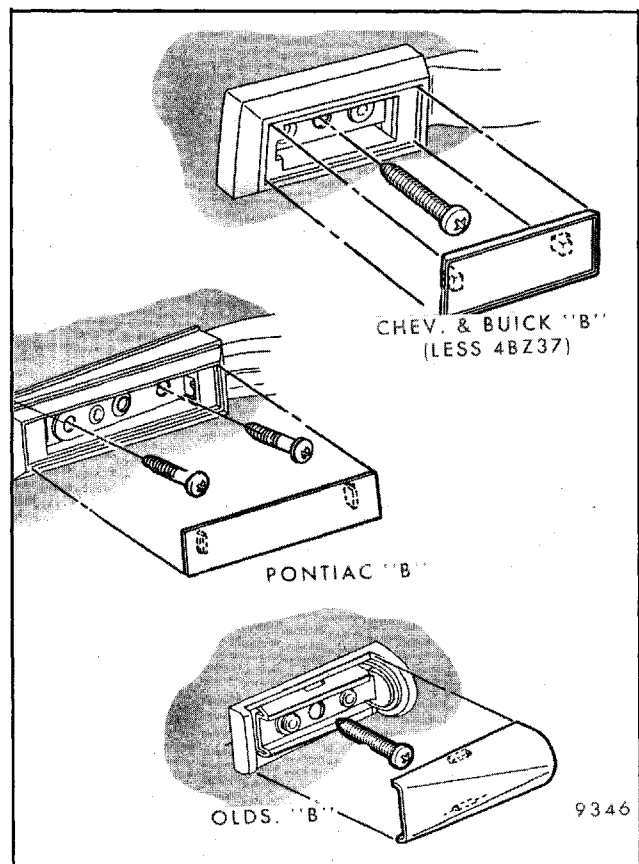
Typical Door Pull Handle Attachment - "B" Body Styles
